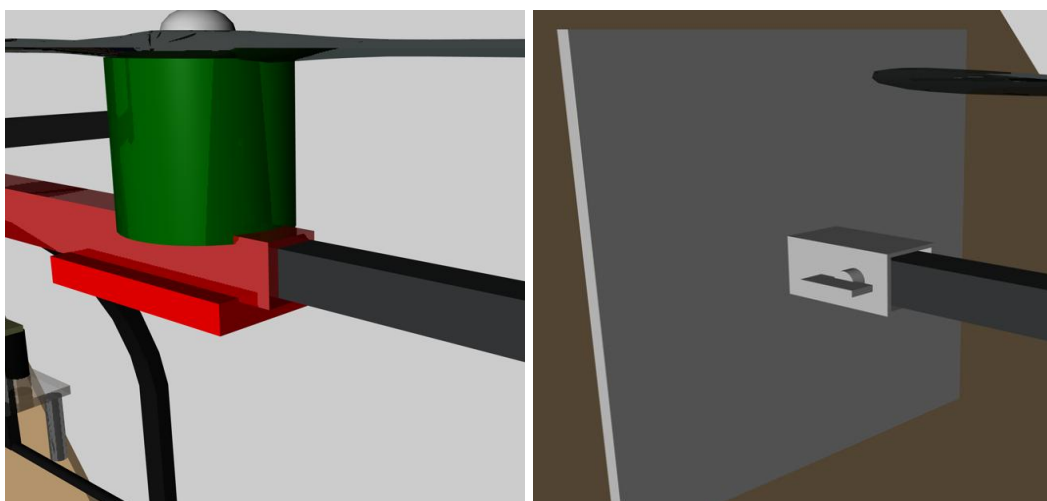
Beam Attaching to Helicopter / Beam Attaching to Frame (Cinema 4D)
